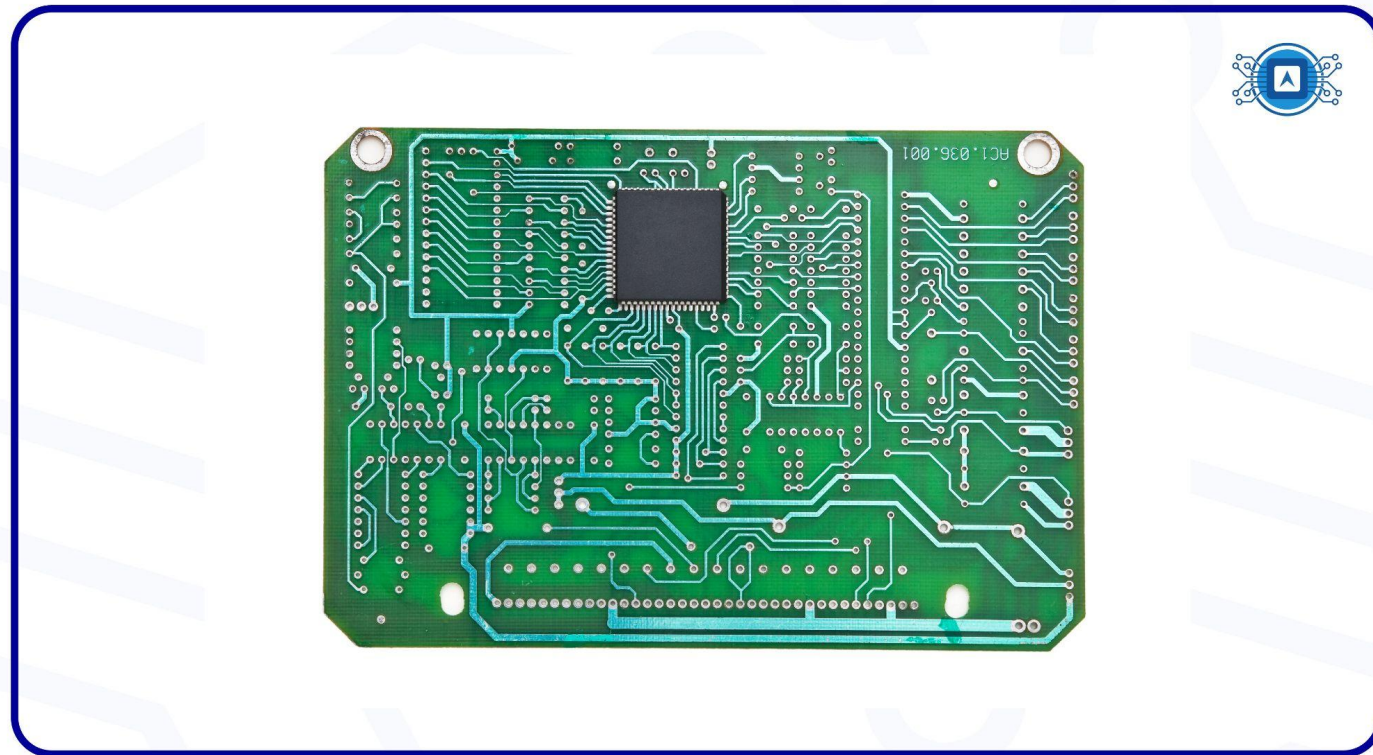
PCB with tracks coming out of a microcontroller in the center of the board. Source: *Shutterstock*.
